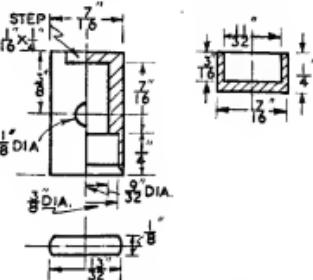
Working piston, gudgeon-pin and compression-adjusting piston
